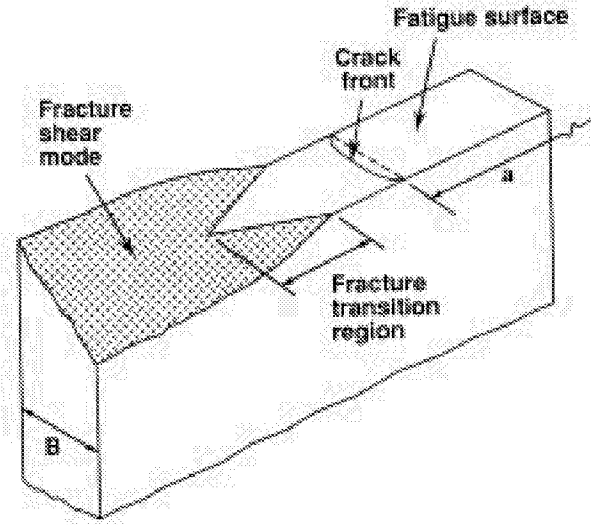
Schematic of fracture surface indicating transition from a flat to a slant crack plane (after [93]).
